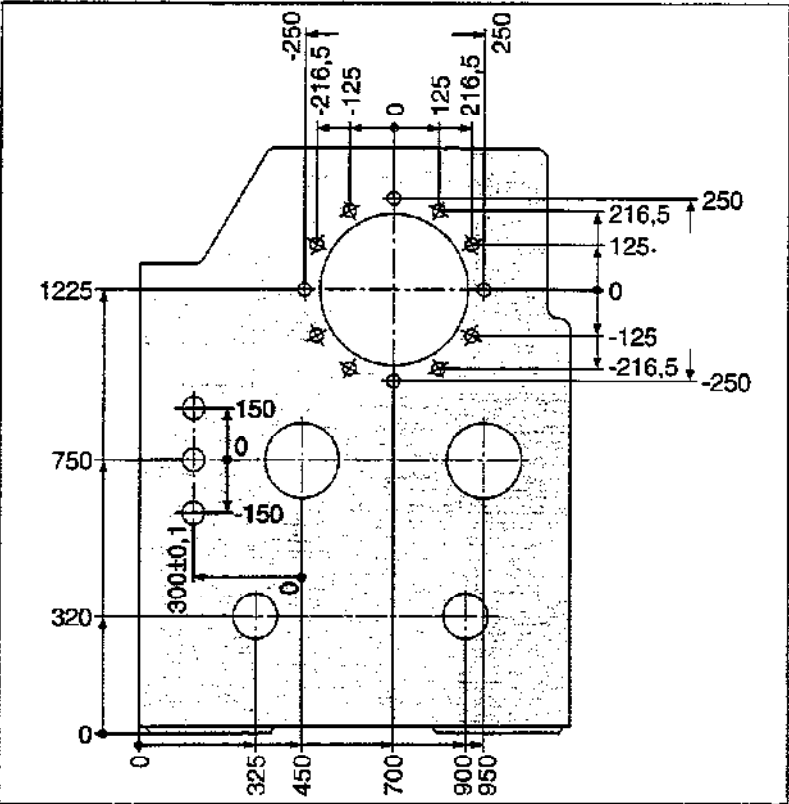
The workpiece datum represents the origin of the Cartesian coordinate system
